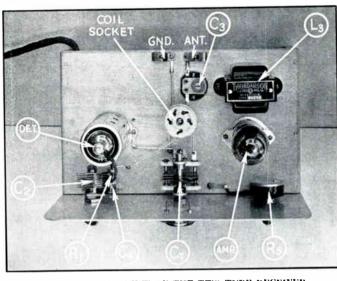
PLAN VIEW OF THE TWO-TUBE RECEIVER
